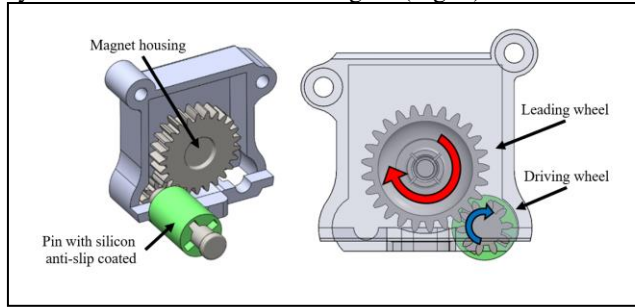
Transmission block assembly consisting of the following elements: piece drive wheel with pin with silicon anti-slip coated, driven wheel, left housing. The movement diagram of the gearbox is shown on the right.
